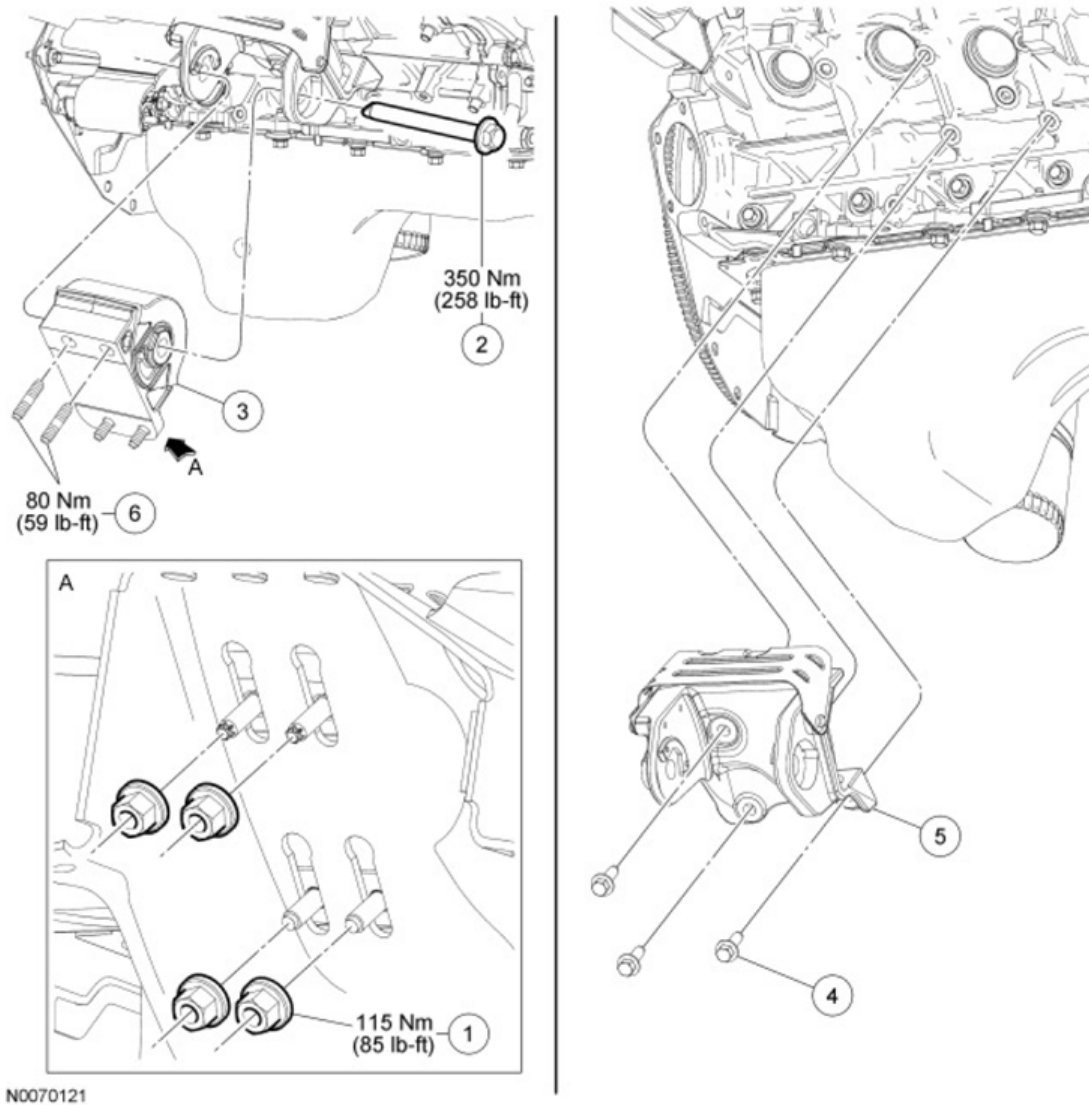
Identifying RH Engine Support Insulator Components With Torque Specifications
